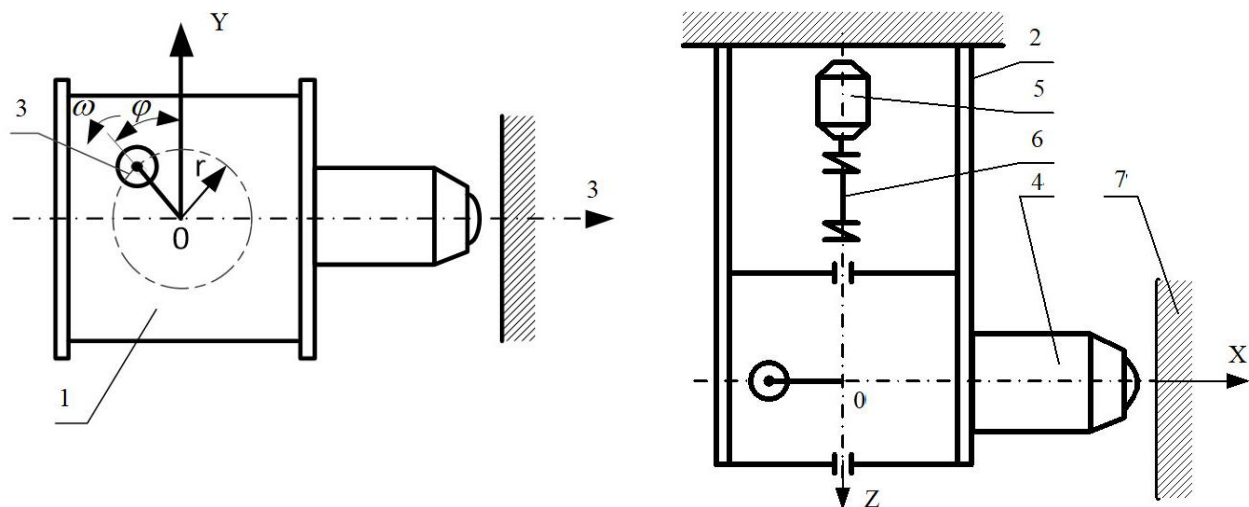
Scheme of eccentric hardener: 1 — housing; 2 — flat spring; 3 — eccentric mass; 4 — tool head; 5 — electric motor; 6 — flexible shaft; 7 — limiter (workpiece)
